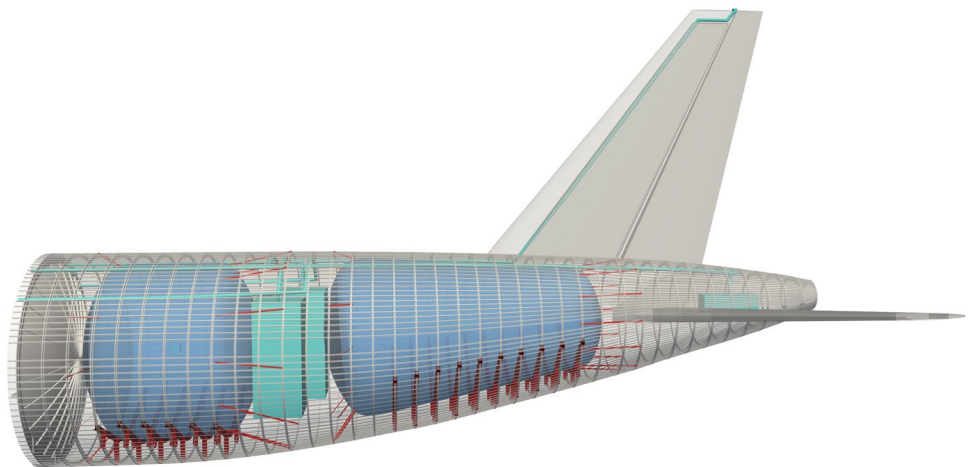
Side view of the DLH25 including tank mounts and system geometries routed outside the fuselage
